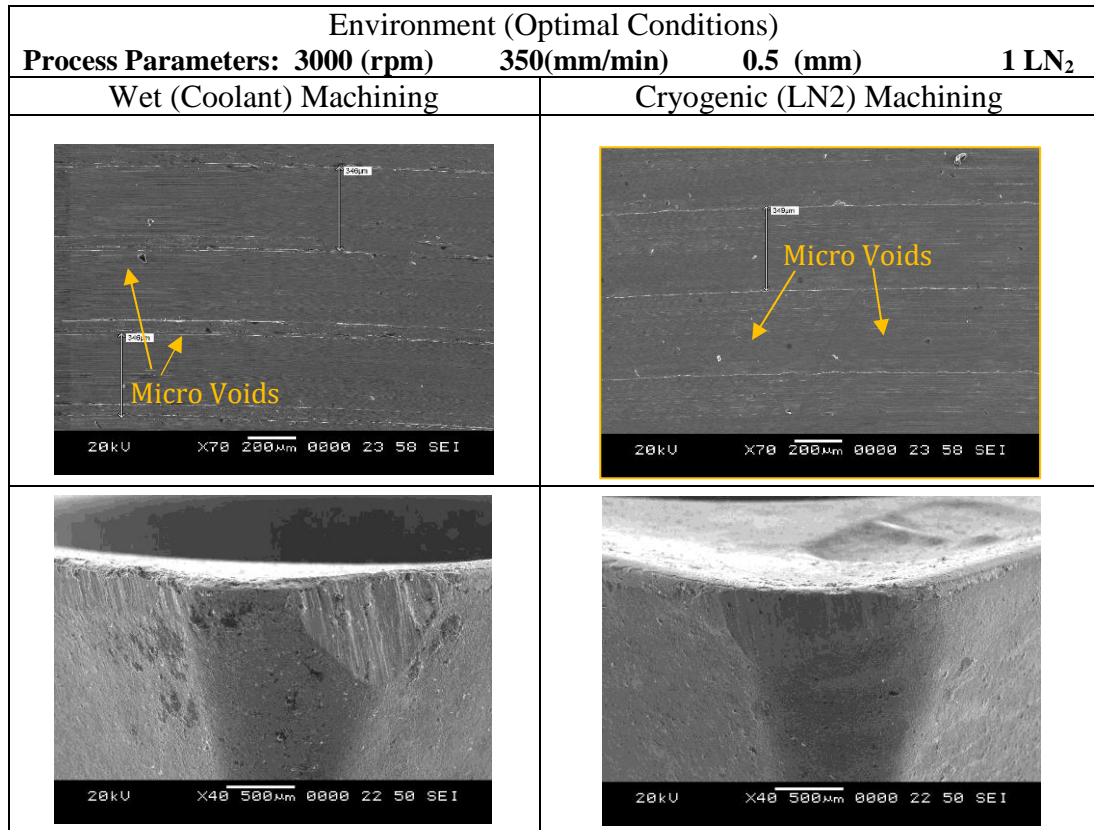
Microscopic view of milling samples of tool flank wear at different machining condition
